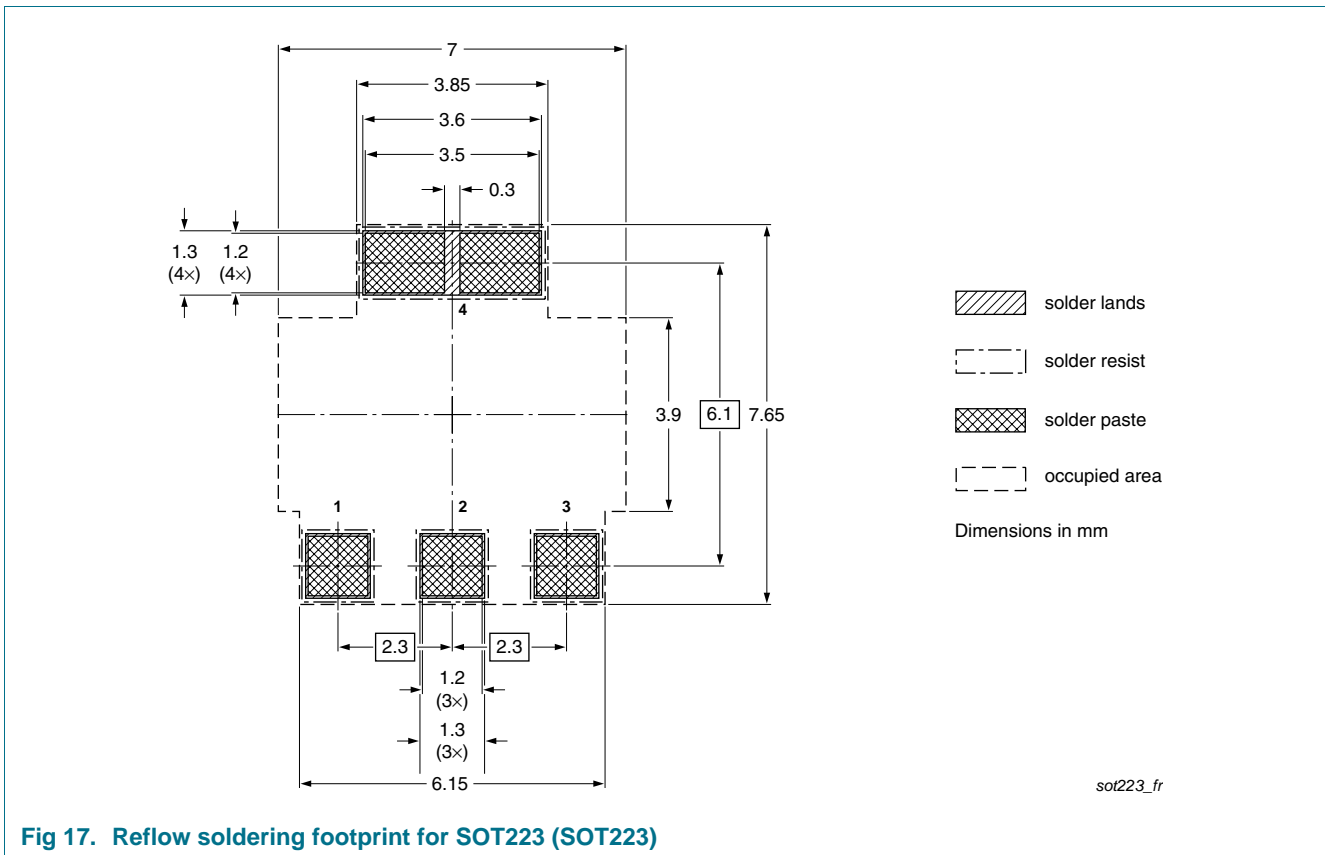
Reflow soldering footprint for SOT223 (SOT223)
